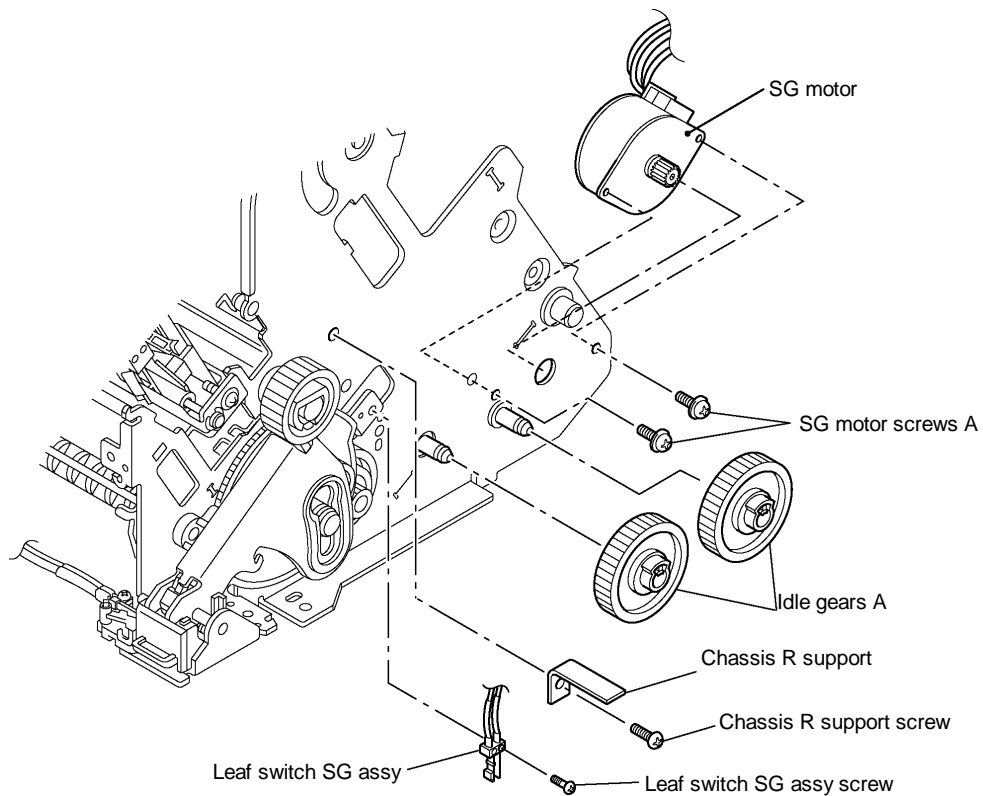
Installing the Right Side of the Chassis 5
